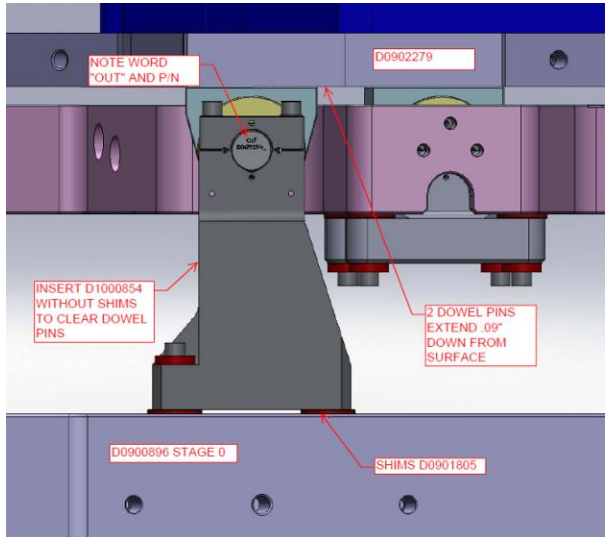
D1000854 Stage 0-1 Locker Assembly Installation 1/2
